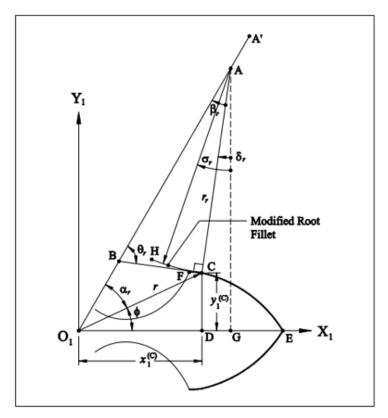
Geometry of tooth Undercut and modified tooth fillet [5]
